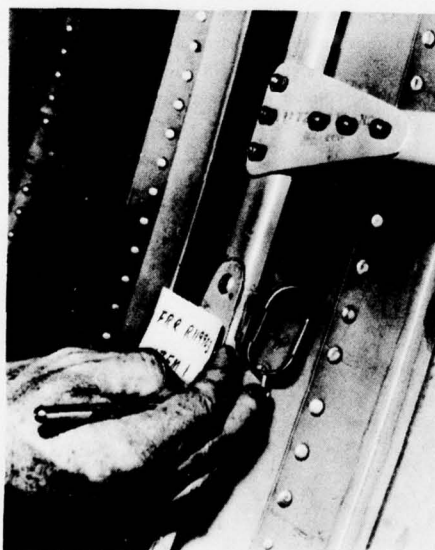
RIVET WHICH CAUSED CRACK
